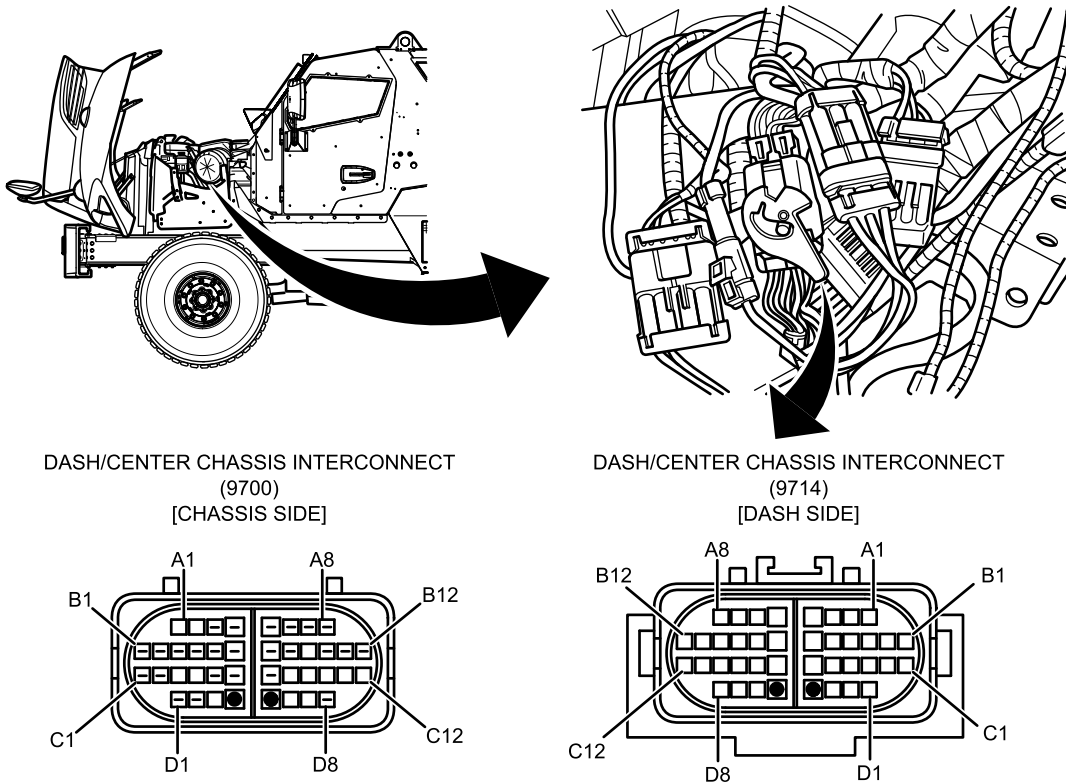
Dash/Center Chassis Harness Connector in Engine Compartment.
